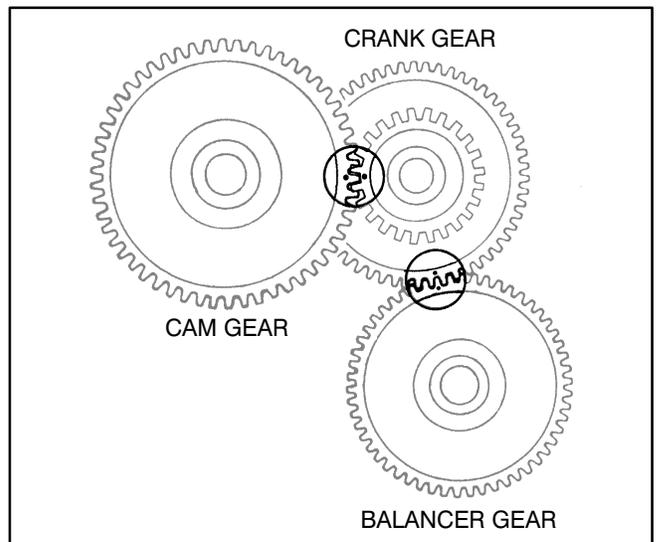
CAM, CRANK AND BALANCER GEAR ALIGNMENT
